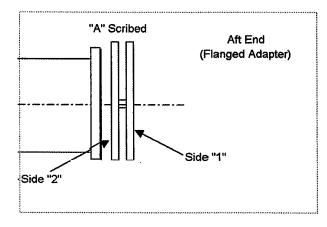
Aft End Bolt Layout for Sub Assembly Balance
